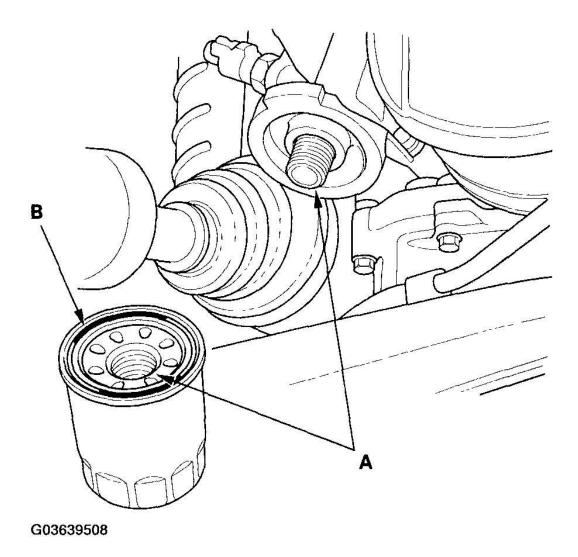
Inspecting Threads And Rubber SealOn Filter Courtesy of AMERICAN HONDA MOTOR CO., INC.
